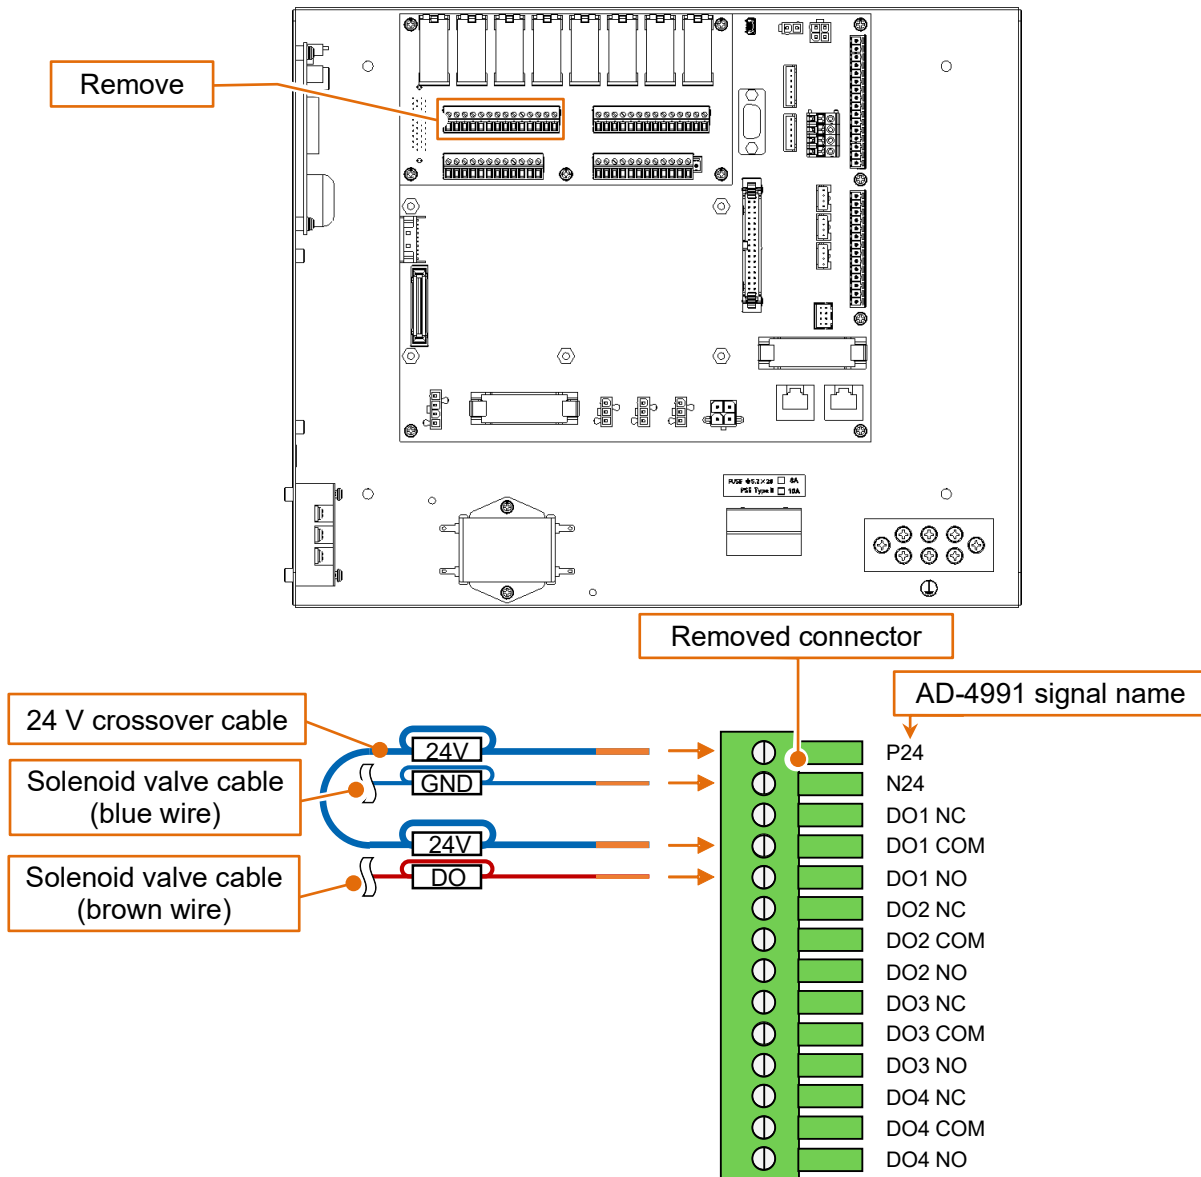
Connecting the solenoid valve cable and 24 V crossover cable
